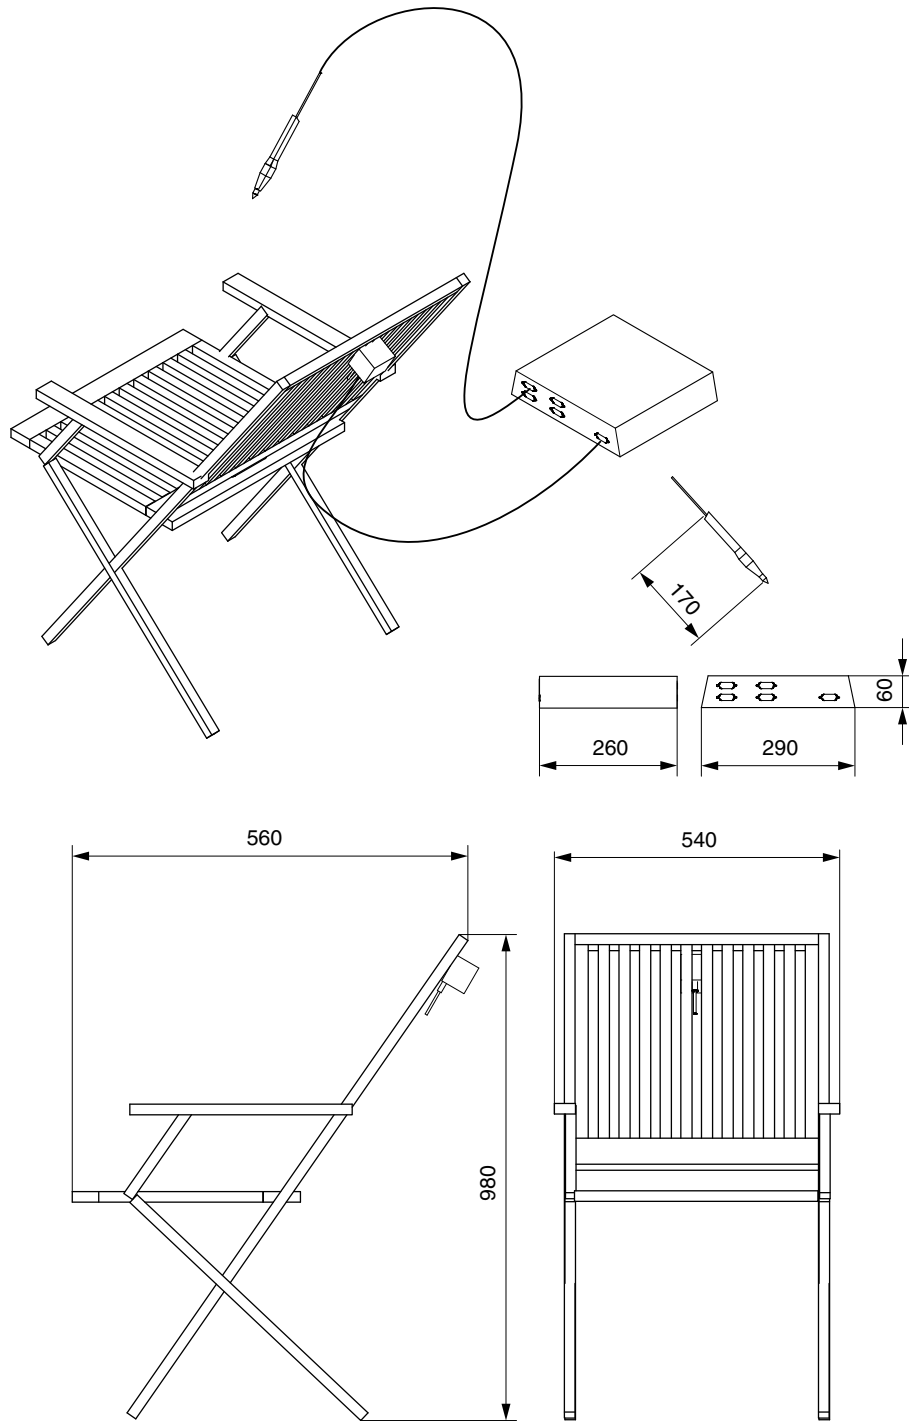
The 3D-digitizer and digitizer chair dimensions in millimeters.
